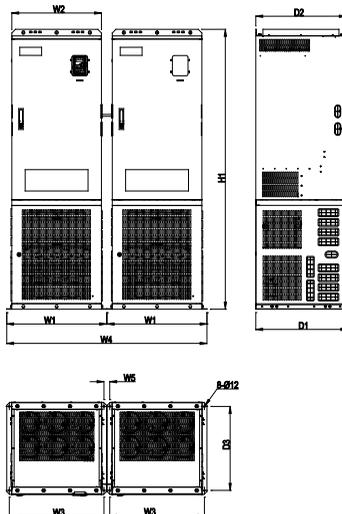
Parallel mounting diagram for 380V 710–3000kW and for 660V 800-3000kW
